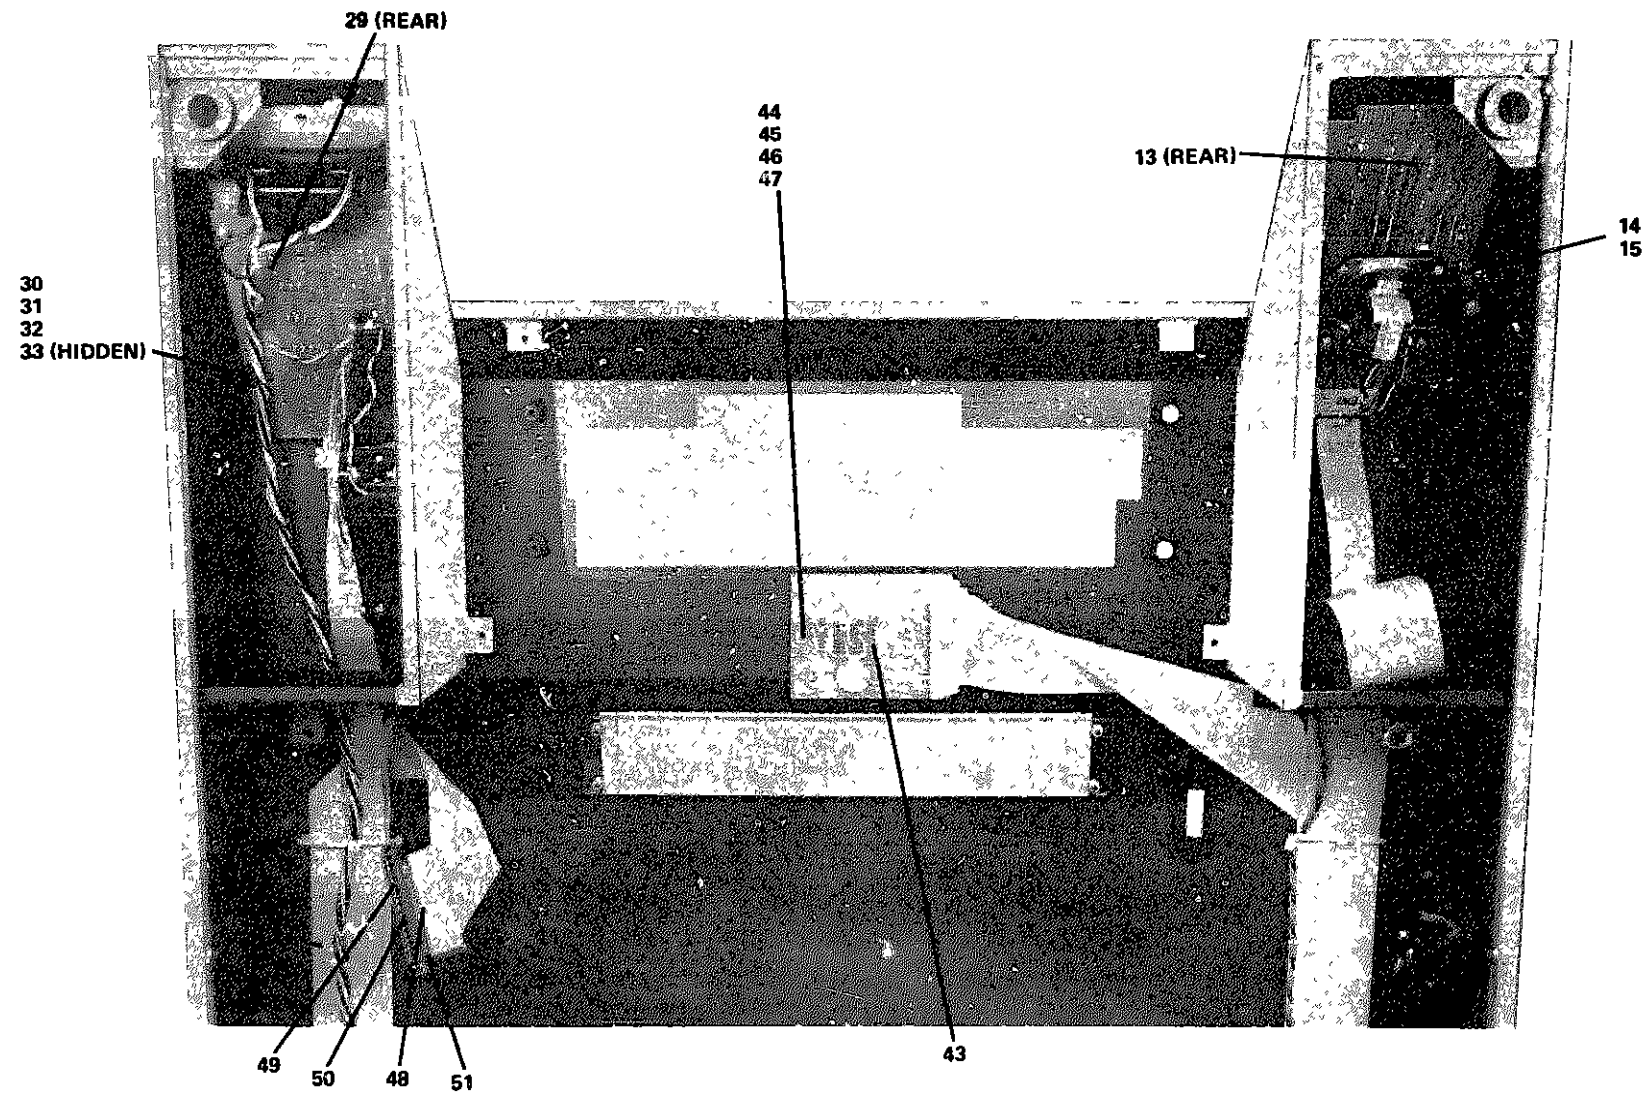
CONTROL ASSEMBLY BOTTOM KEYBOARD REMOVED 1A6 (SHEET 3 OF 6)
